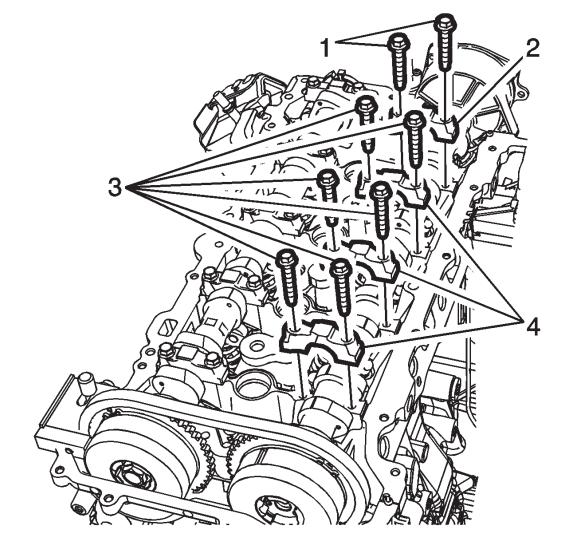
Exhaust Camshaft Bearing Rear Cap Bolts And Cap Courtesy of GENERAL MOTORS COMPANY
